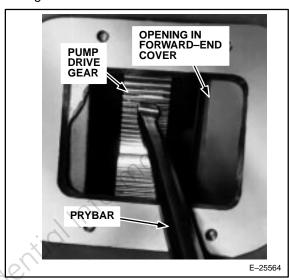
Checking Integrity of Pump Drive Gear Rubber–Bonded Coupling.
